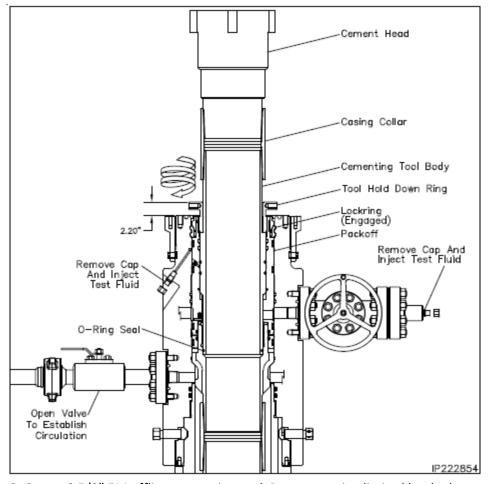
Cactus 9 5/8" 5M offline cementing tool. Pressure rating limited by the lesser of 5M tool rating or the 9 5/8" pup joint and casing.
